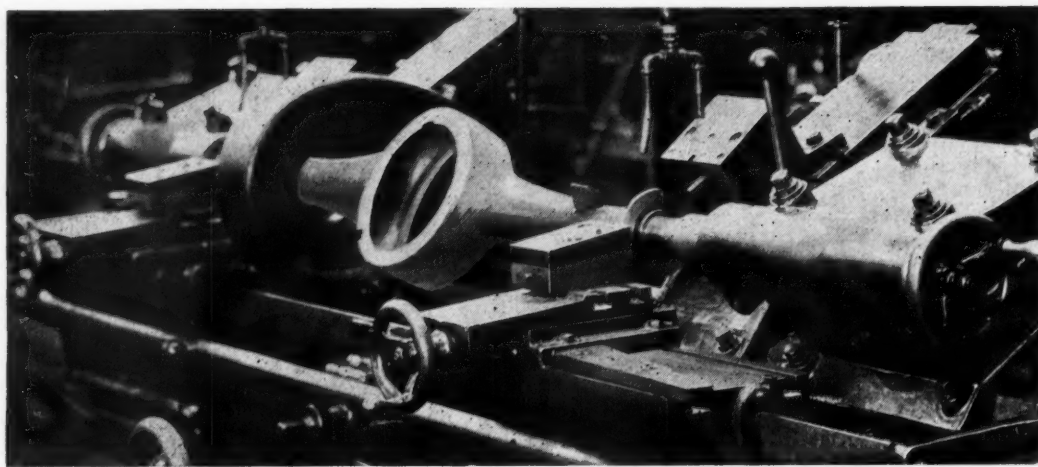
Reamed ends are mounted on rotating centers for flange turning and facing in Sundstrand double end machine
